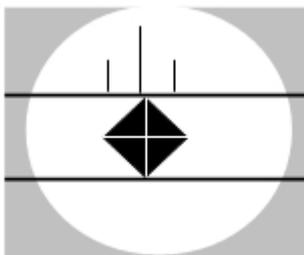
Move Bottom Filar Line to Bottom Tip
